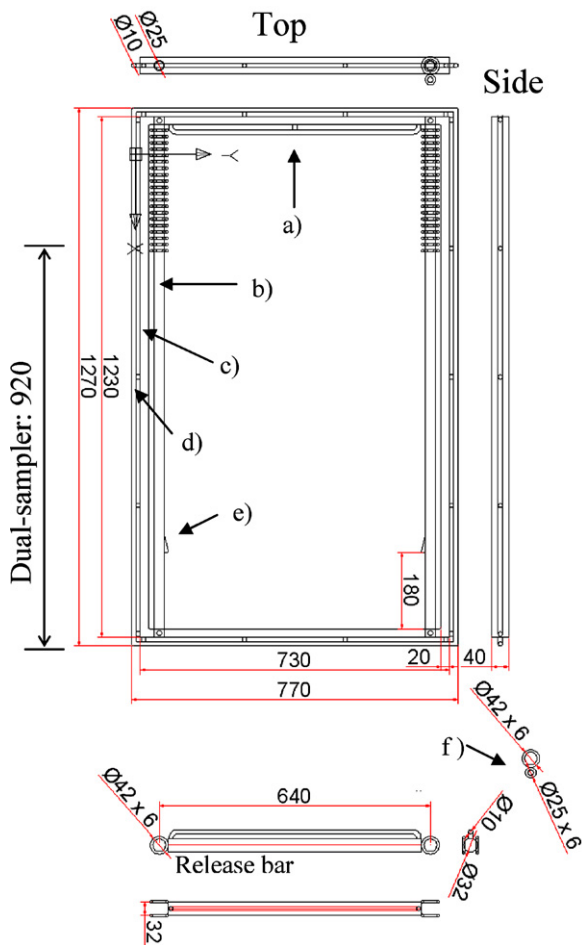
Drawing of the triple-sampler frame. Dimensions are indicated in mm and Ø indicates diameter. The height of the dual-sampler is indicated. The letters indicates: (a) net attachment bar; (b) sliding tube; (c) main frame; (d) frame for net attachment; (e) lock; and (f) sliding ring for net attachment.
